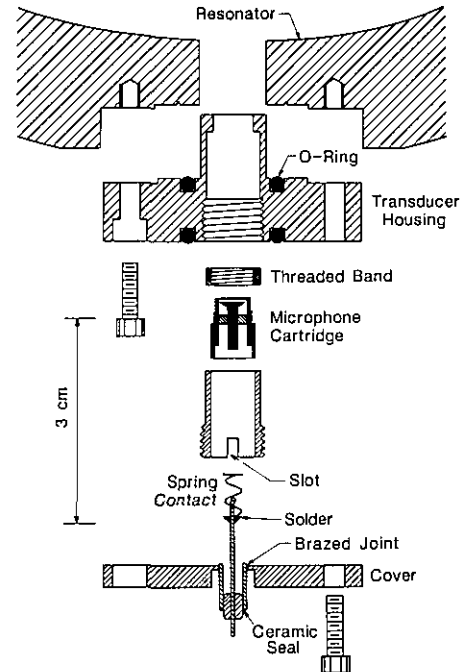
Exploded section of transducer housing assembly and electrical feedthroughs.
